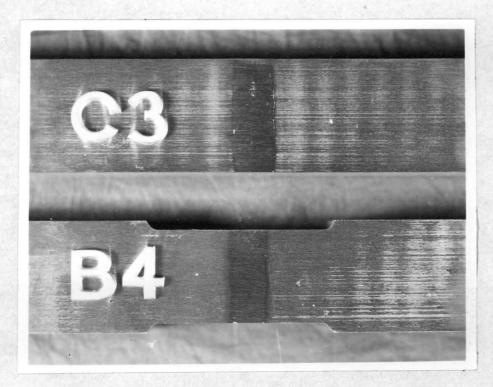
Flexure Test Bar (upper) and Tensile Test Bar (lower), before Fracture.
